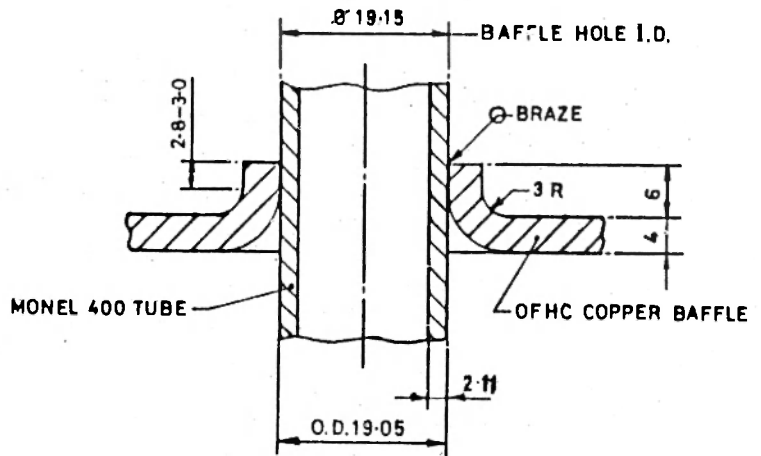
Joint design for vacuum brazing of baffle to tube.
